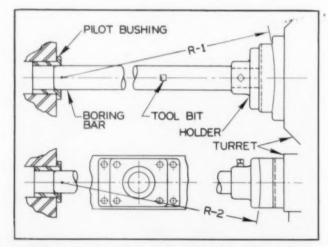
shows a method for aligning a boring bar used with an engine or turret lathe. Should the tail-end of the bar be below or to one side of the spindle center-line, then the tool will cut large at the start of the bore and gradually taper inward as the cut progresses. That is, the tool will "climb." By providing a holder with convex to concave faces, as shown, the tail end of the bar can be accurately aligned with the spindle. Radii R-1 and R-2 should be the approximate distance from the end of the bar, as it enters the bushing, to the respective curved faces of the holder.
